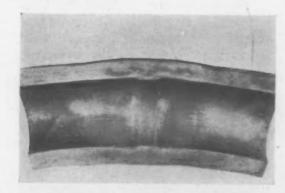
Internal upsets easily machined to remove small cracks or fissures.
